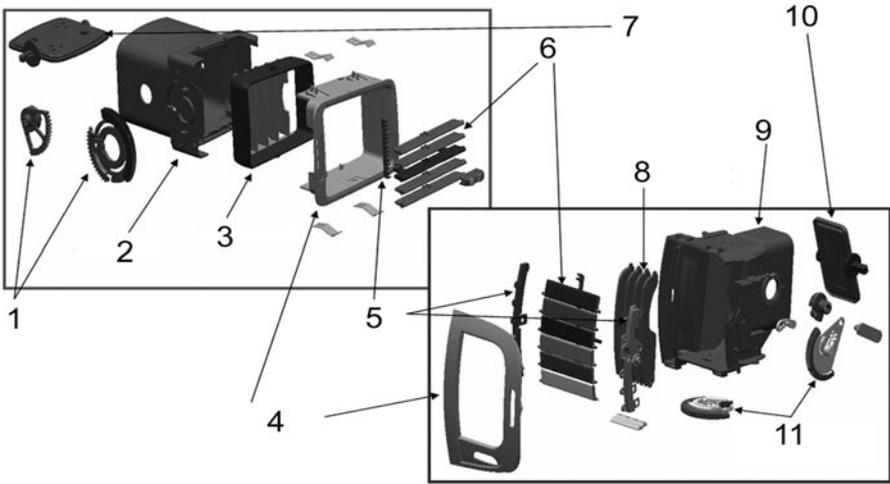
Exploded view of two air vent types and their components: Control wheel 1 and 11, body 2 and 9, rotor 3, stack 4, combs 5, fins 6, close door/shutter 7 and 10, baffle 8.
